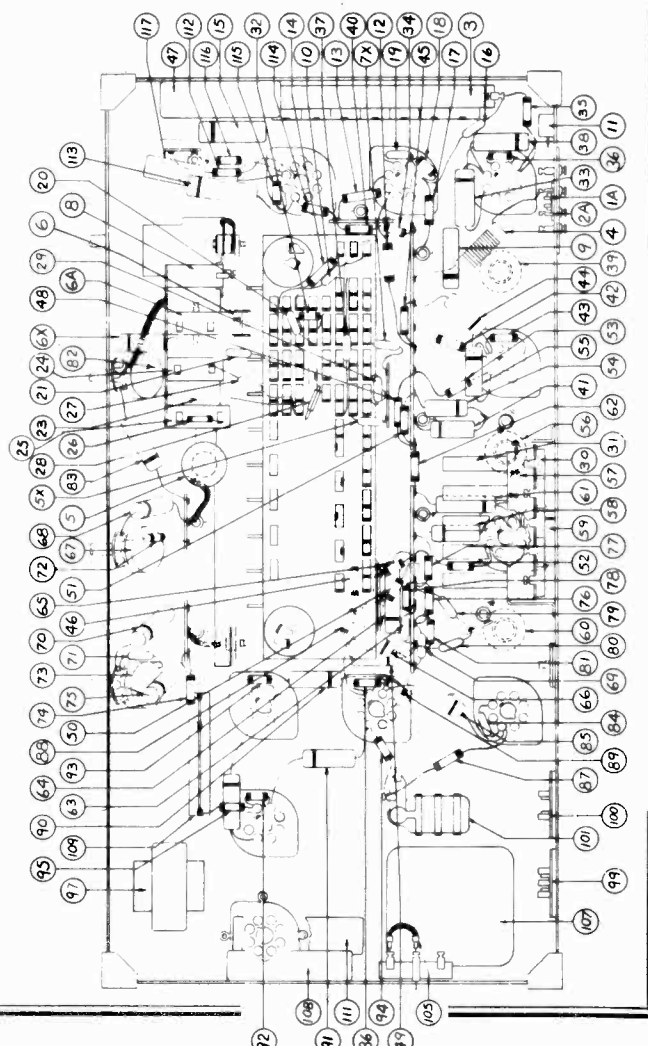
LOCATIONS OF PARTS—UNDER CHASSIS
